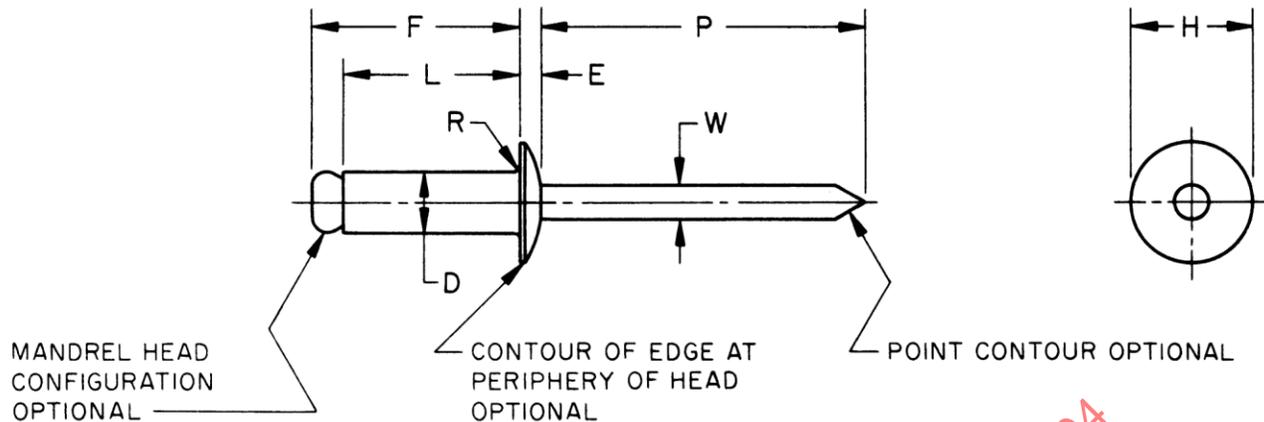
REGULAR AND LARGE PROTRUDING HEAD STYLE MANDREL BLIND RIVET DETAIL (SEE Tables 6A AND 6B)
